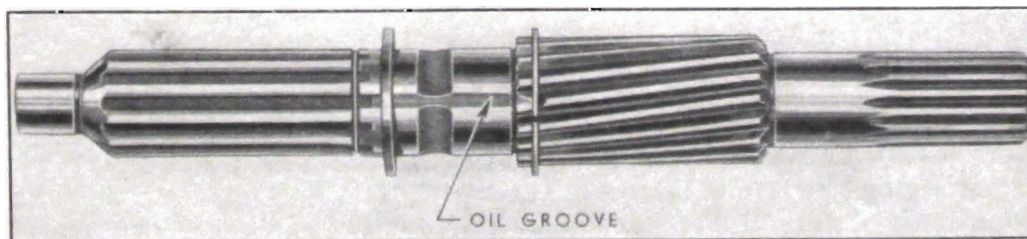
Transmission Main Shaft—Series 60-70-90
